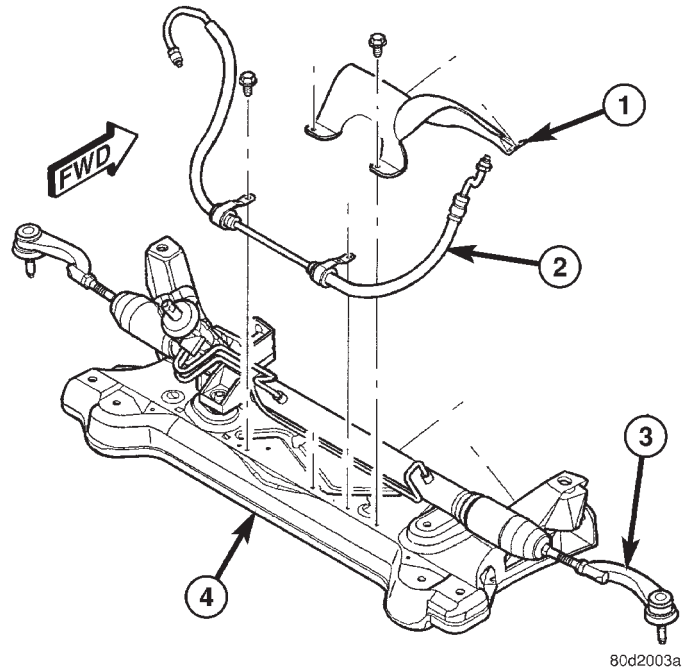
PRESSURE HOSE MOUNTING TO CROSSMEMBER
